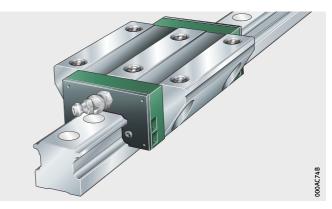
End pieces without upper relubrication hole KIT.KWSE..-..3
